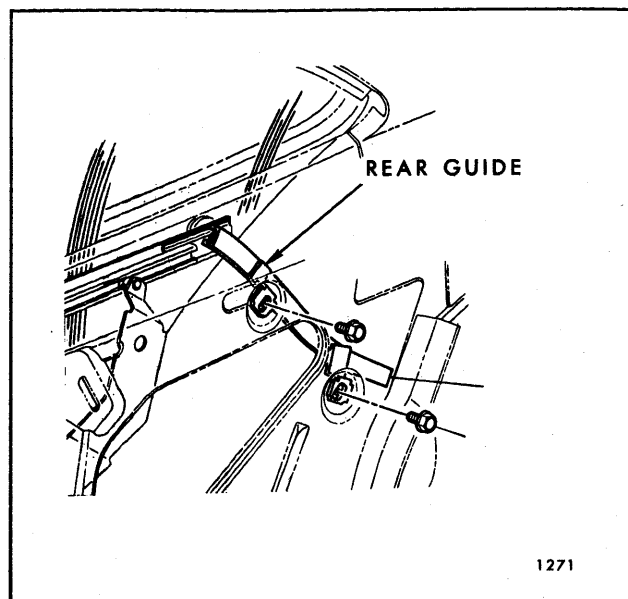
Rear Quarter Window Rear Guide Assembly - "Z-37" Styles
